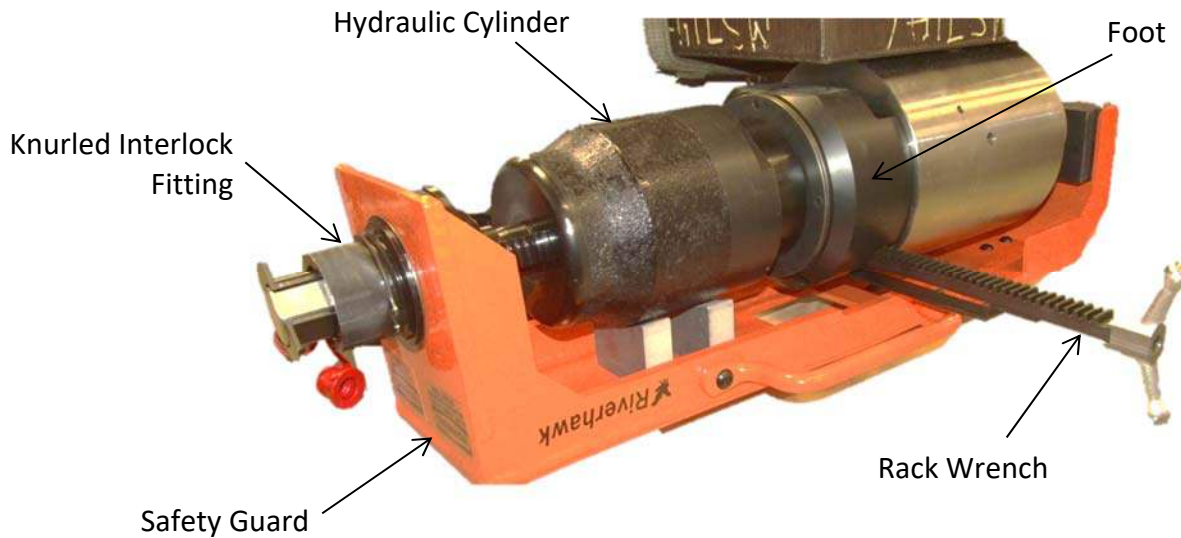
D – 6 O'clock Position Spur Gear Spanner and Rack Wrench - Tensioner HT-5425, HT-7979, and HT-8133
